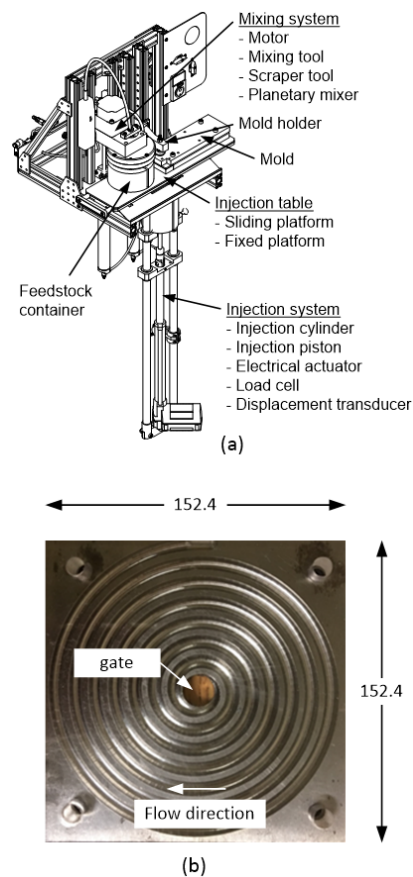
(a) Injection system and (b) spiral mold (dimensions in millimeters)
